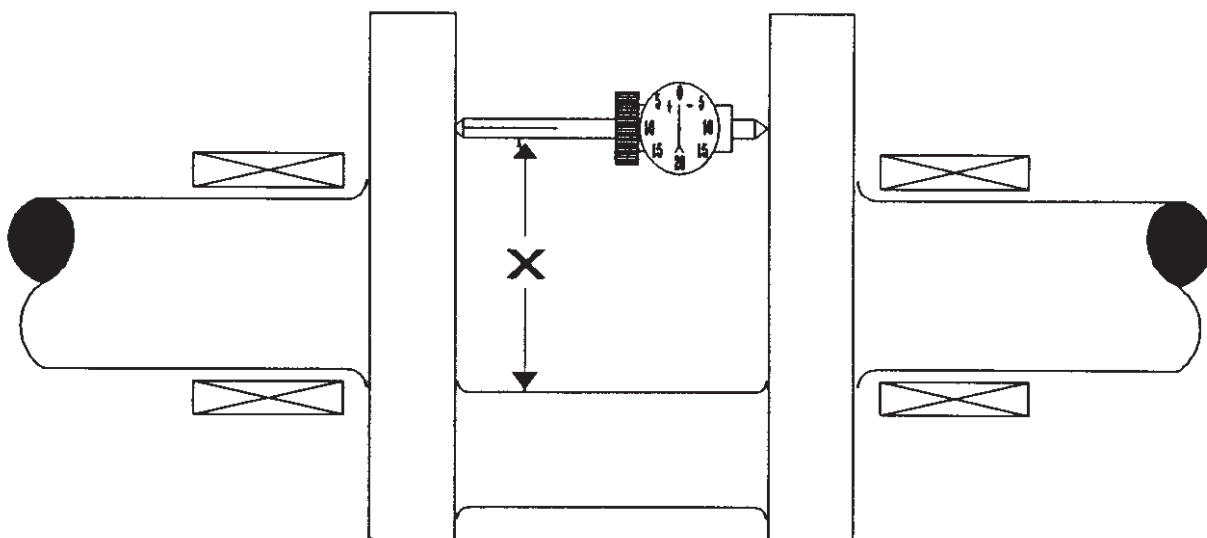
Mounting the Crankshaft Deflection Gage
